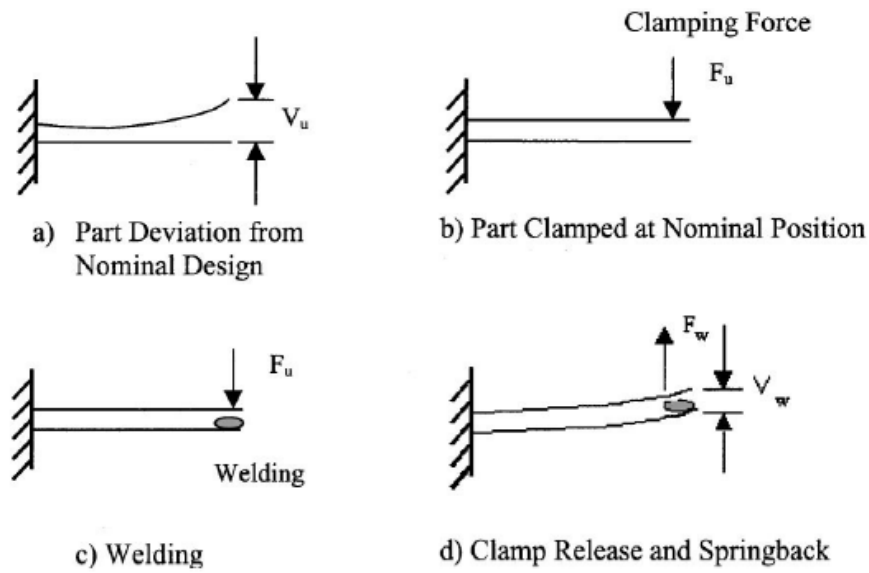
Four-step compliant assembly process - Extracted from [6]
